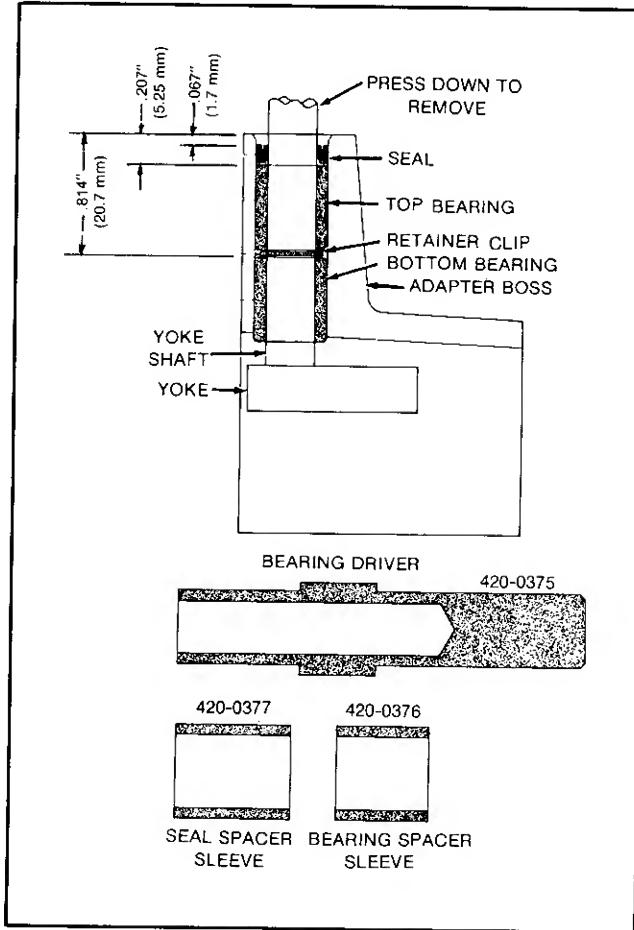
BEARING INSTALLATION AND TOOL PACKAGE (420-0374)
